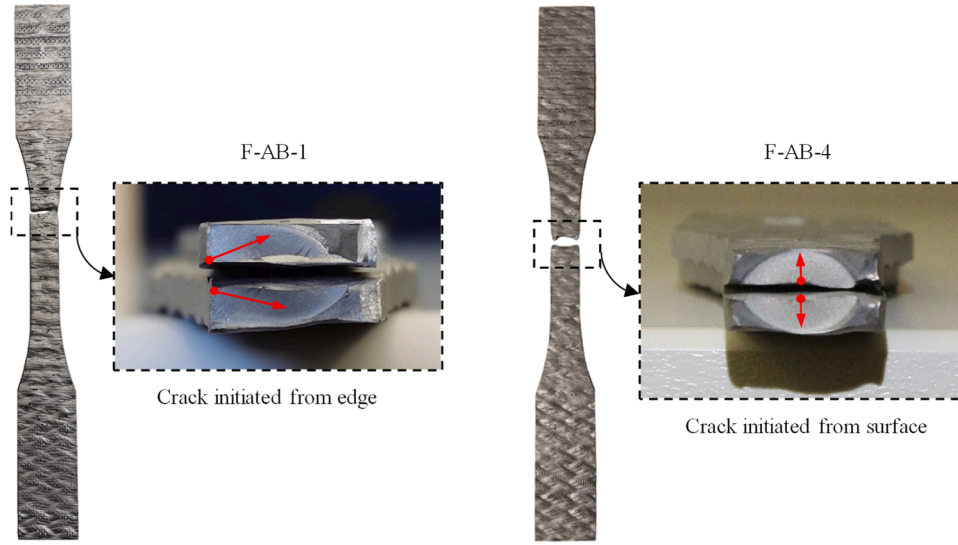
Typical fractured as-built coupons and fracture surfaces.
